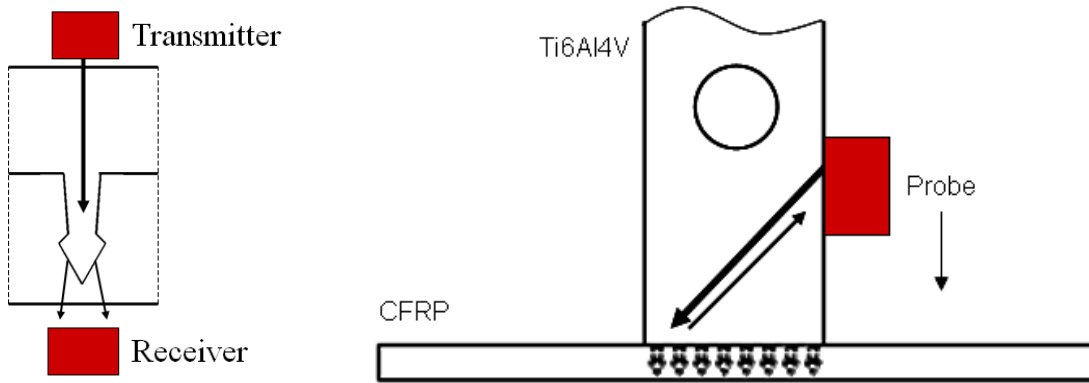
Alternative inspection configurations. (a) Through-transmission. (b) Use of a shear probe to bypass geometric complexity such as transverse holes.
